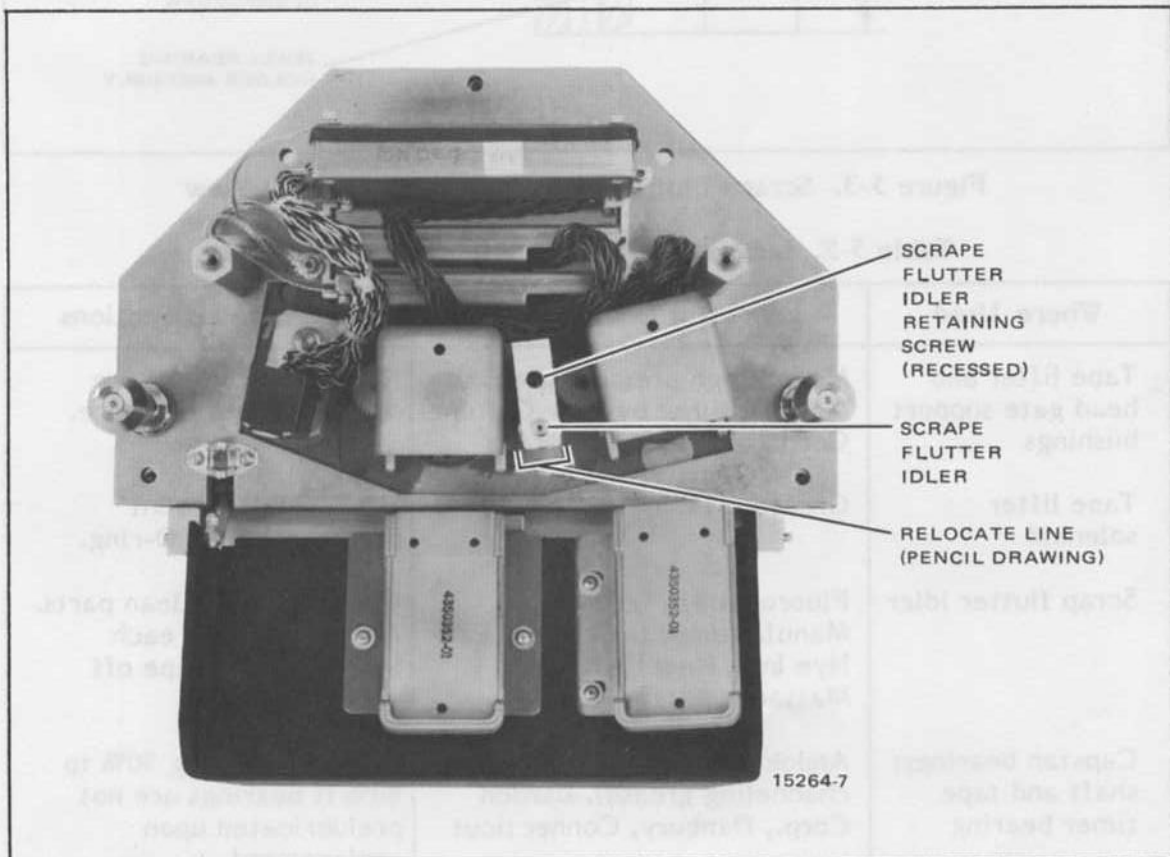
Scrape Flutter Idler Mounting Screw Location
